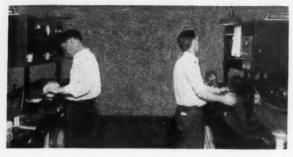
Inspecting armatures and rotors. Defects in the windings—if any—are indicated by instruments in the faces of the cabinets.
